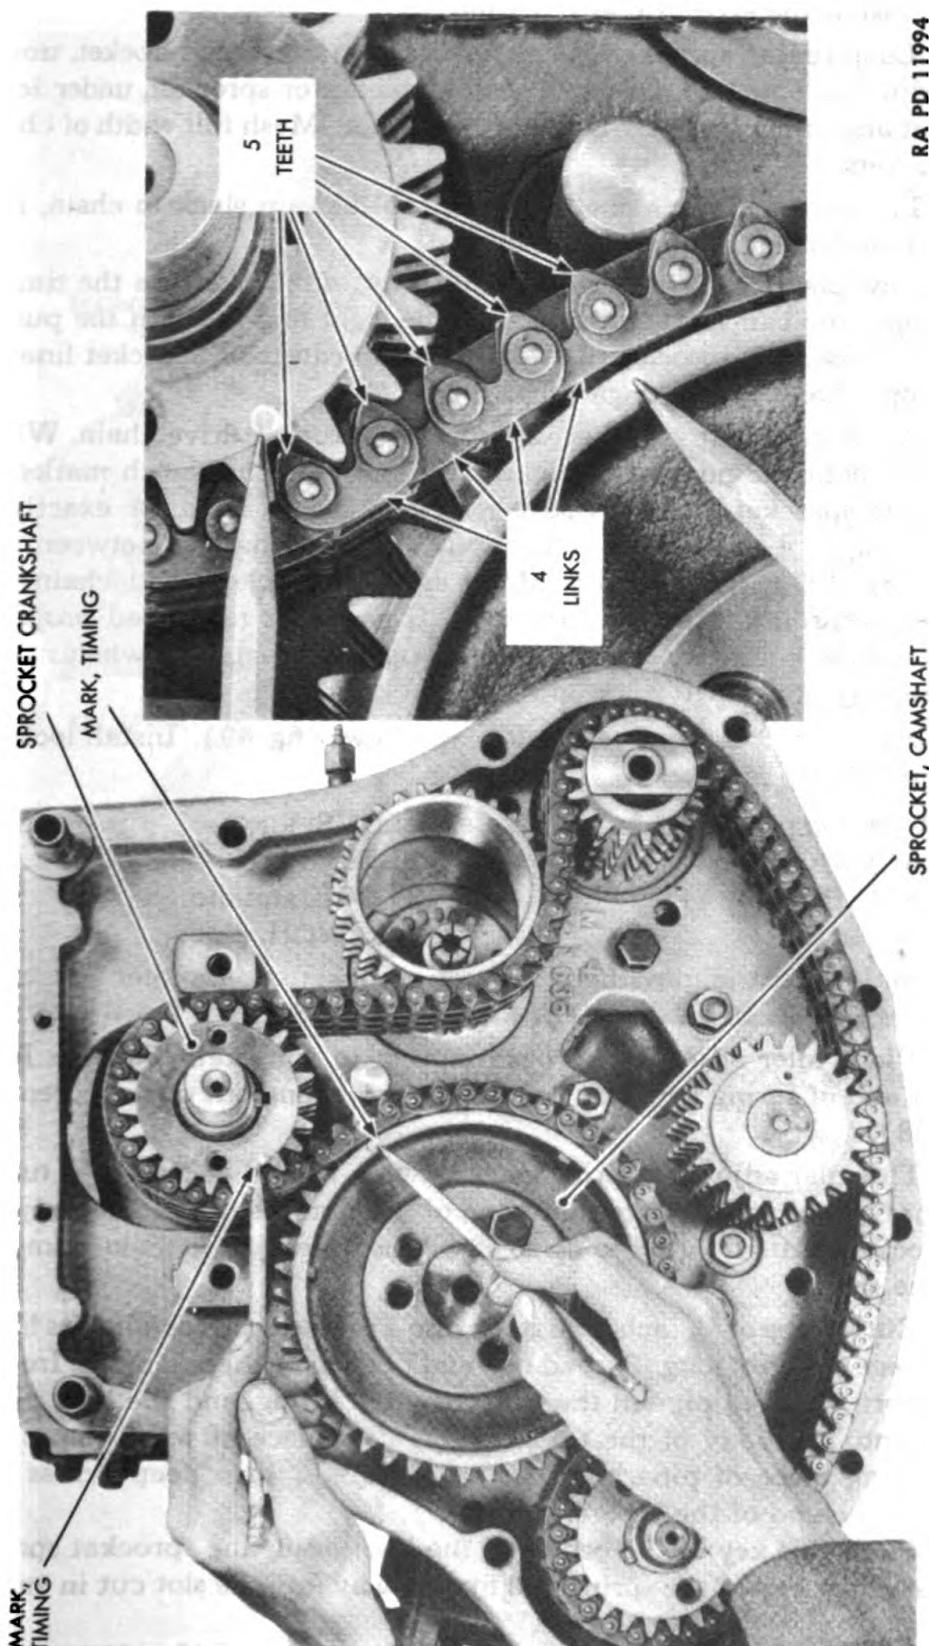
Camshaft and Crankshaft Sprocket Timing Marks
